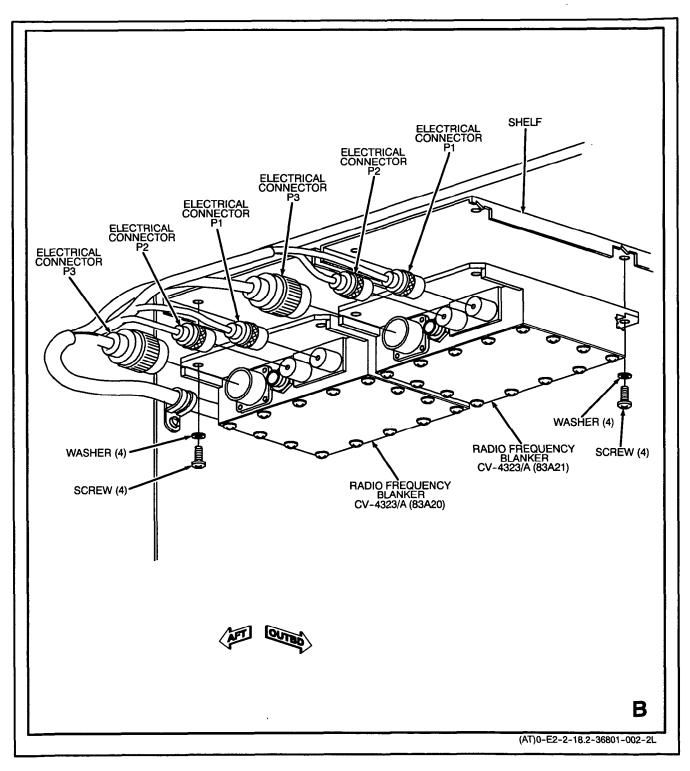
Removal and Installation of Radio Frequency Blanker CV-4323/A (83A19, 83A20, and 83A21 (Sheet 2)
